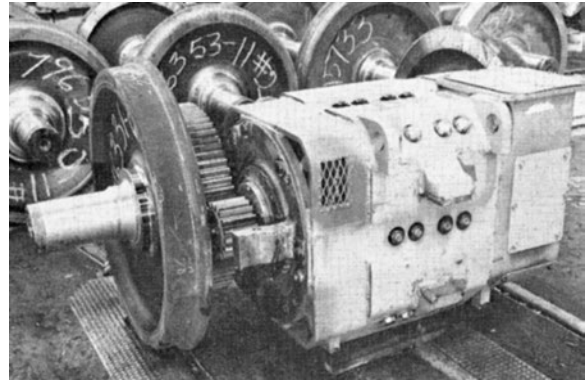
Railroad wheel drive. (Courtesy of Electro-Motive Division, General Motors Corp., La Grande, Illinois.)
